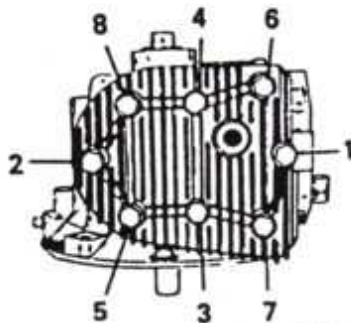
On Models VM70, HM70, VH70 and HH70, tighten cylinder head cap screws evenly to a torque of 180 in.-lbs. (20 N·m) using tightening sequence shown.
